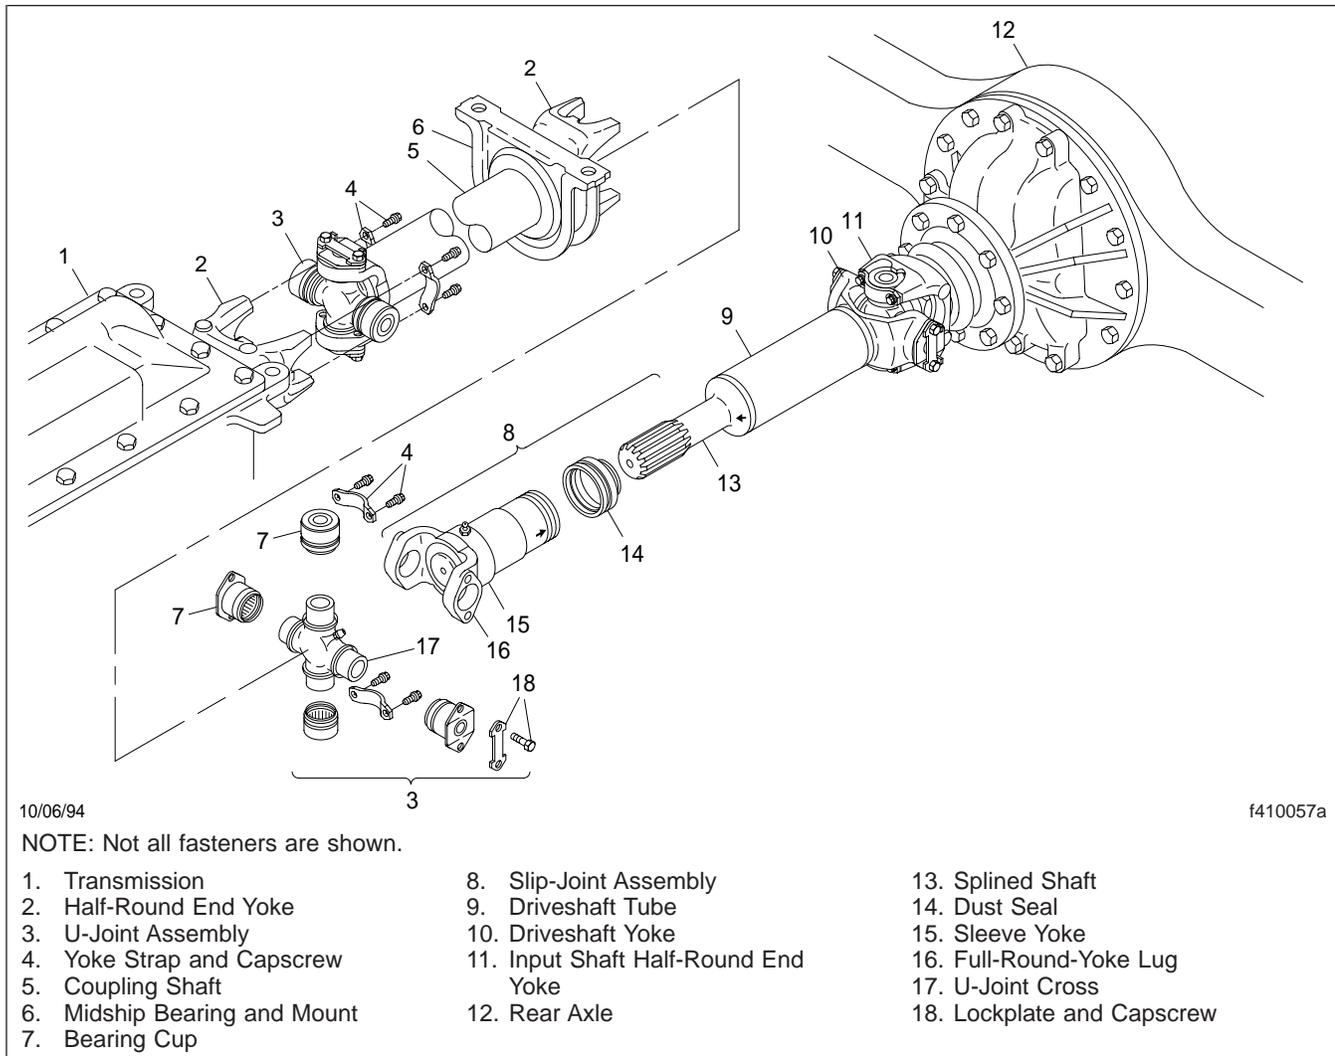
, Driveline Assembly With Midship Bearing for Single-Axle Installation
